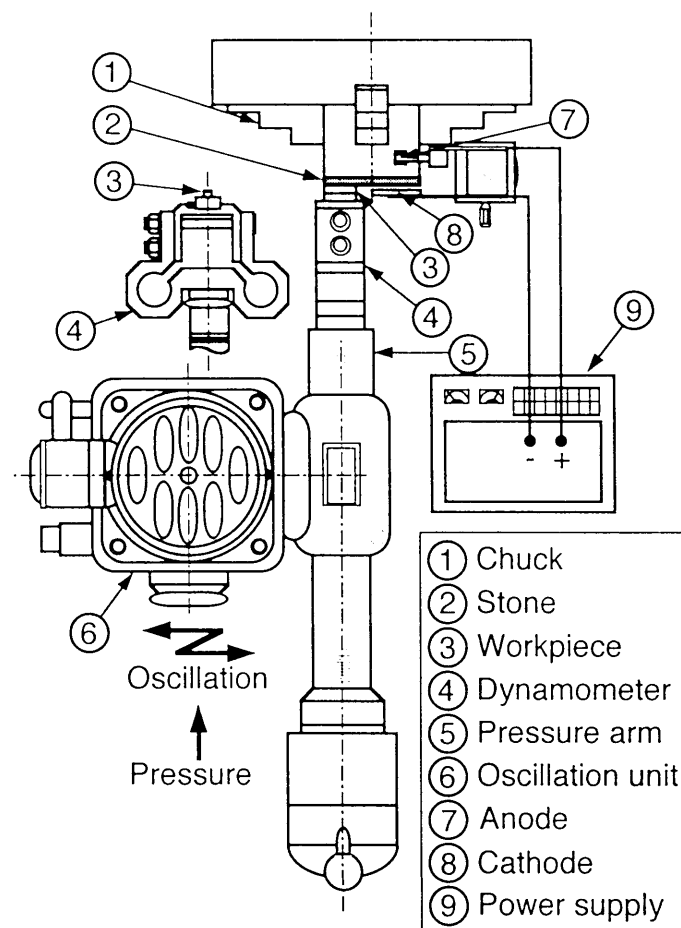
Schematic illustration of main part of superfinishing machine
